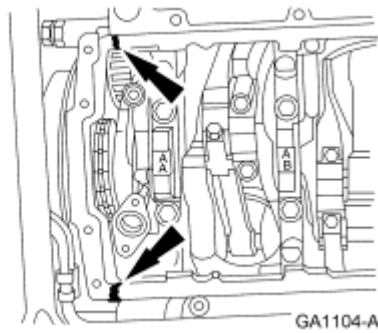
Applying Sealant At Front Cover-To-Cylinder Block
